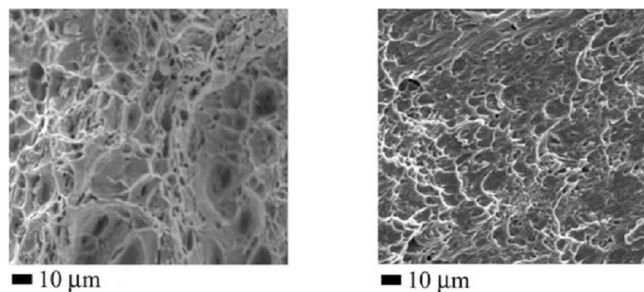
SEM fractography of Weldox 420 steel (a) failure due to ligament necking and (b) failure due to ligament shearing [97].
